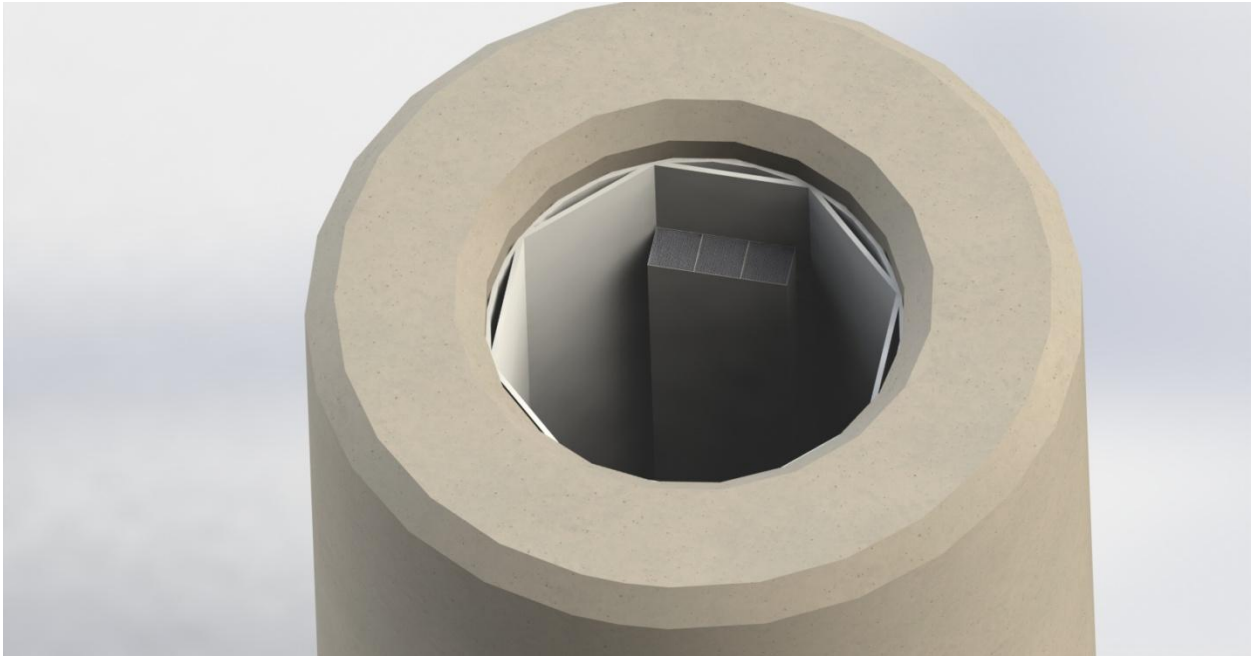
Three baskets with stainless steel tubes placed inside of a modeled dry cask
